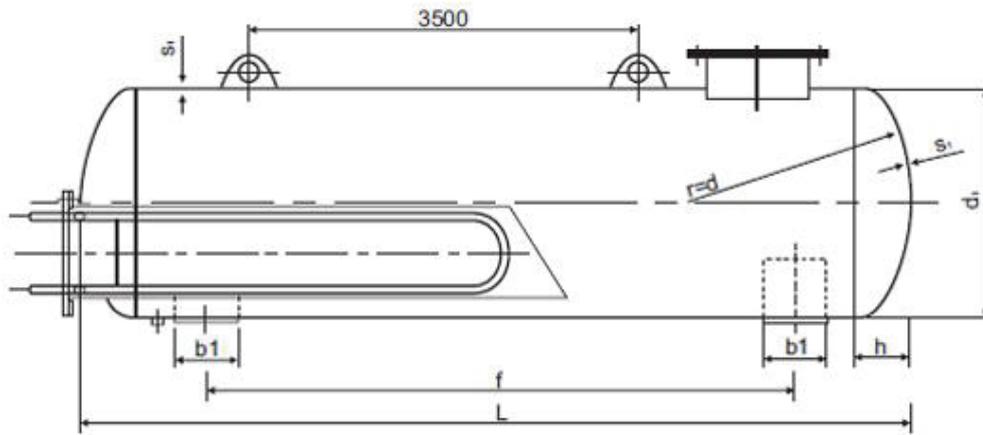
Dimensions of cylindrical fuel oil tanks
